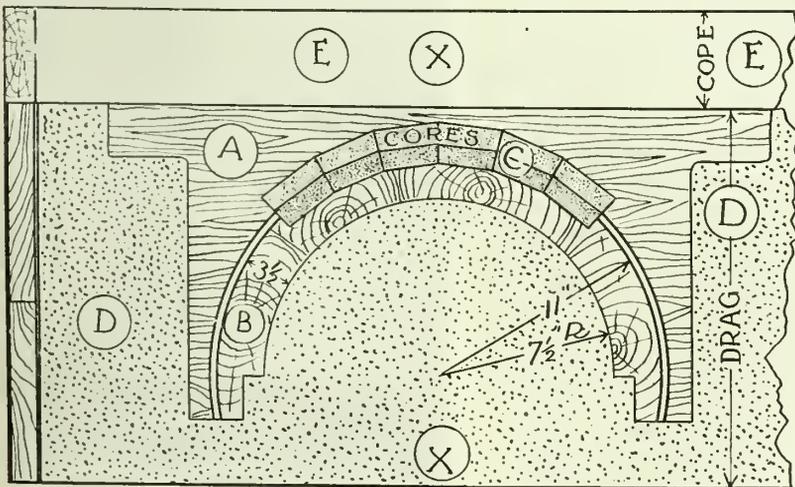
SHOWING MOLD WITH SIDE OF FLASK REMOVED
